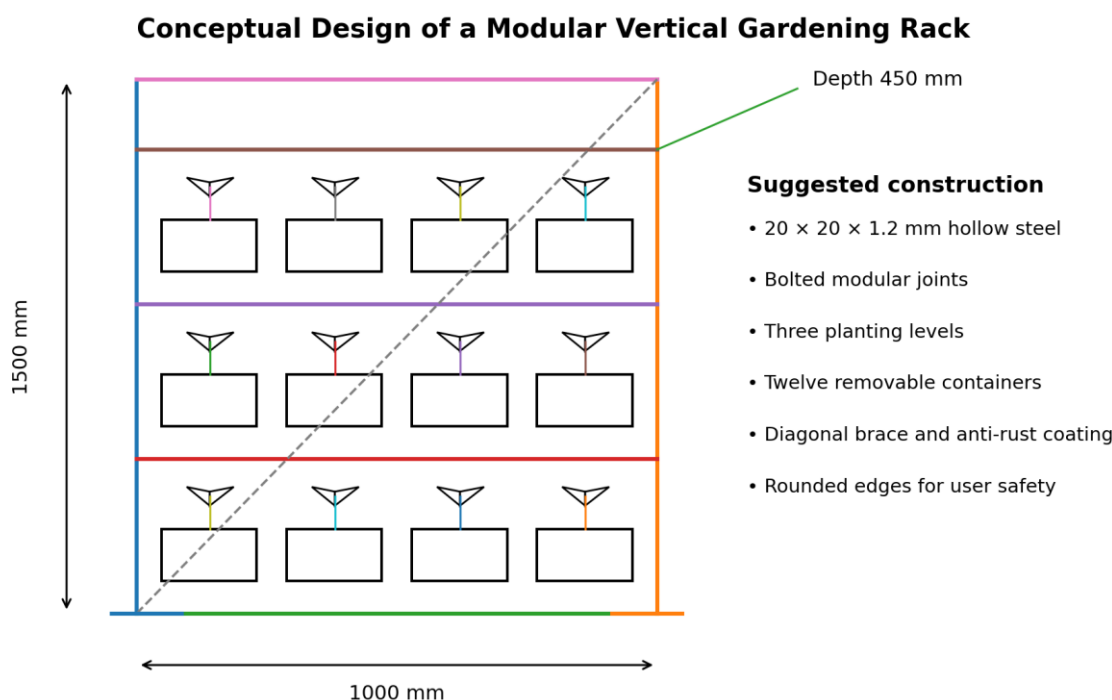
Conceptual design and suggested specifications of the modular vertical gardening rack
